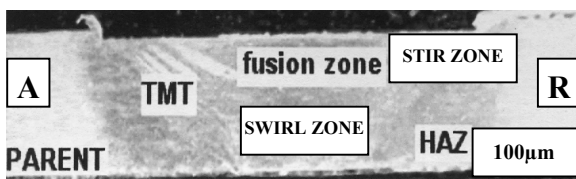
Optical micrographs showing the flow pattern in the nuggets after Friction Stir Welding.
